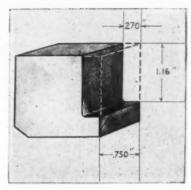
Details of the magnesium part shown in the process of machining in Fig. 1.
